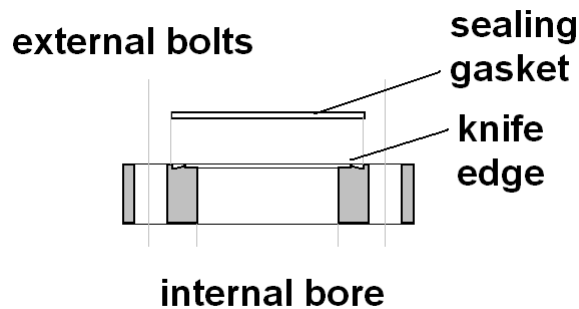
The Conflat flange and gasket system as used in the cell design. Made to several standard diameters they are used to connect and seal UHV parts to a system. The seal is formed by stainless steel ‘knife-edges’ in each flange cutting into a softer copper (or occasionally silver coated or viton) gasket.
